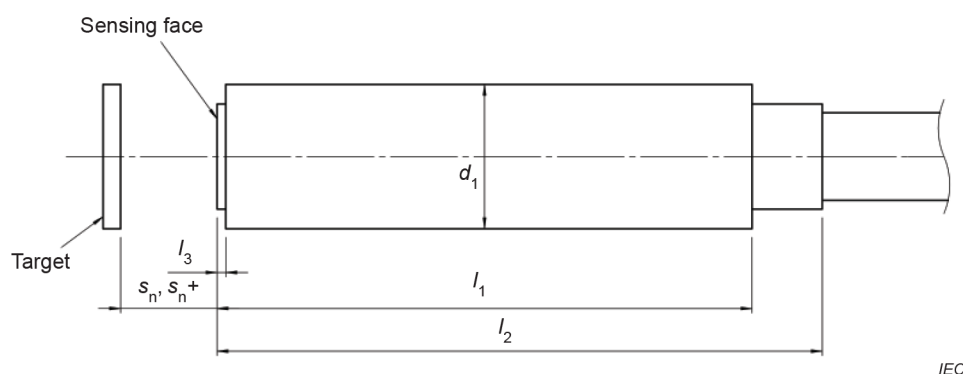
(IB) – Dimensions for smooth barrel – cable type
